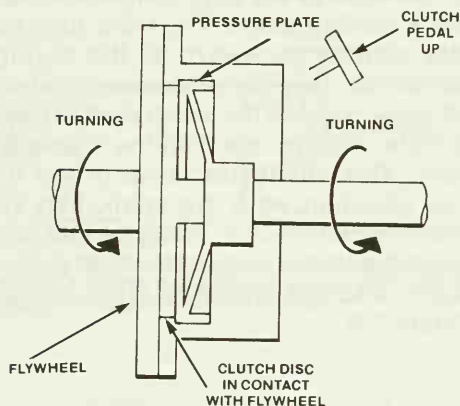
When the pedal is up, the flywheel and pressure plate drive the clutch disc.
